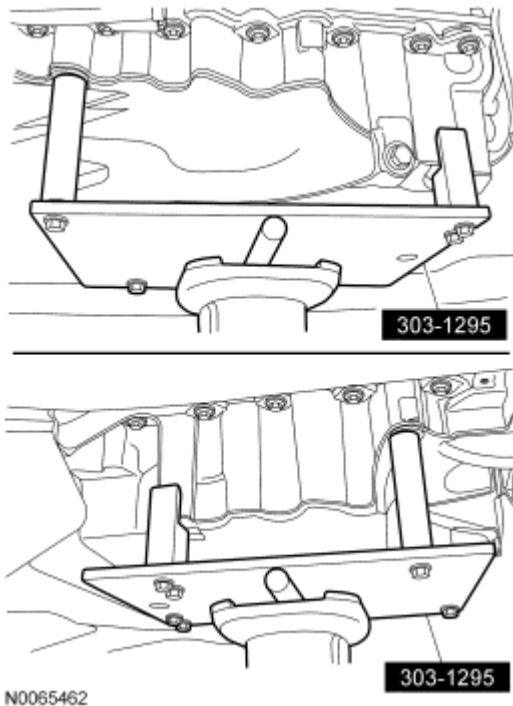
Positioning Floor Jack & Special Tool (303-1295) Under Oil Pan
